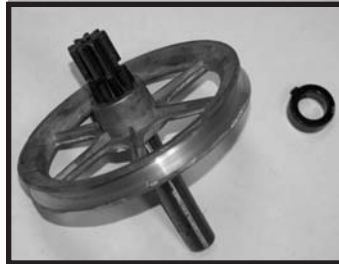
Turn drum assembly over and complete tightening of bolts.
